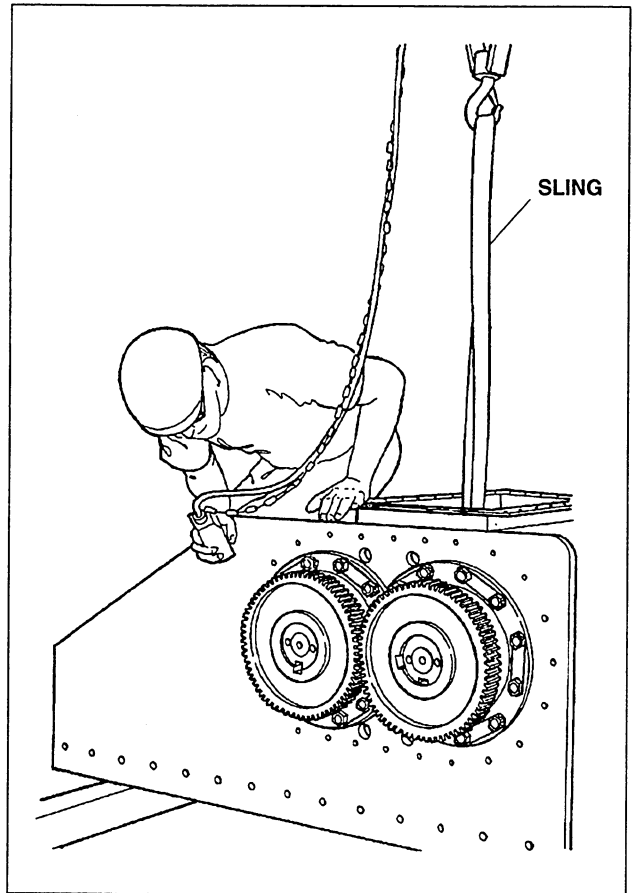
Turning the Shaft Using a Hoist and Sling
